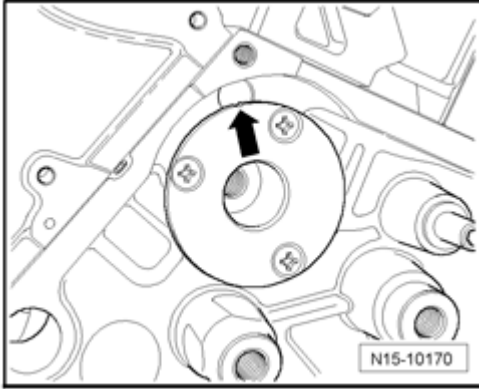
Installing Intermediate Shaft Mount With Notch At Top
